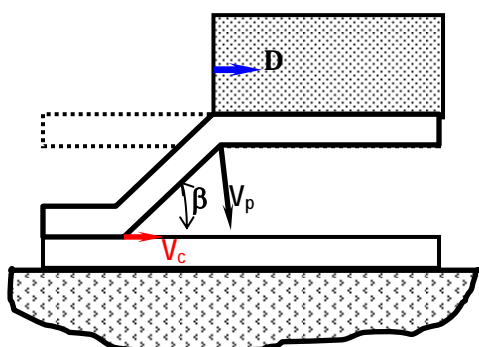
Main and diagram image of the process of welding through explosion
